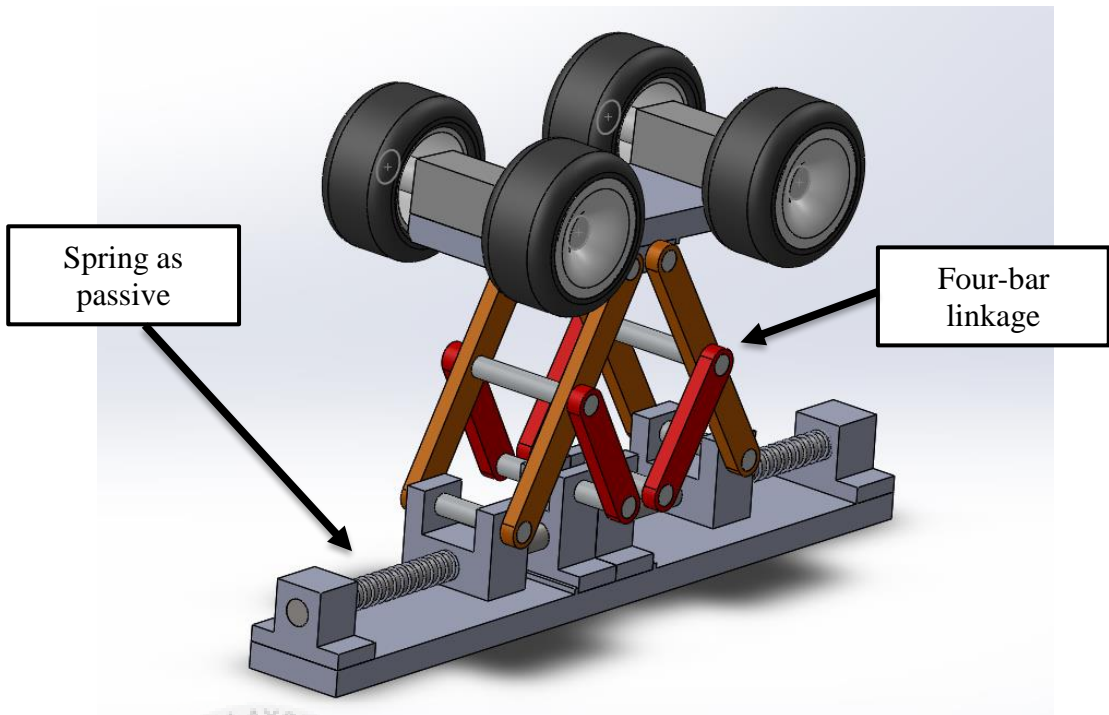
The Adaptive Mechanism of the Pipeline Inspection Robot
